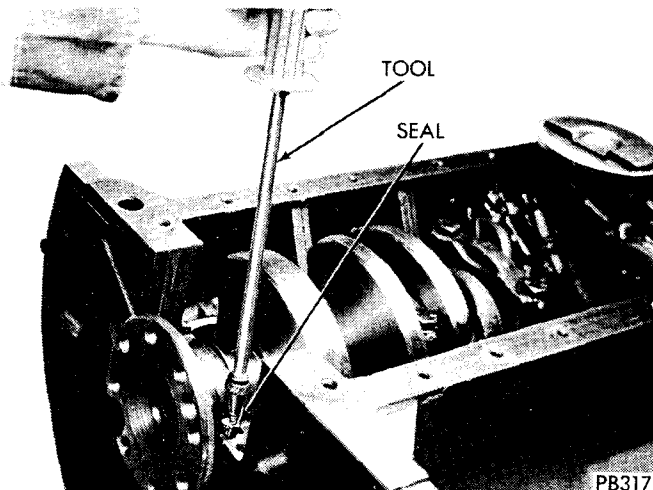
Removing Upper Oil Seal with Tool C-4148
